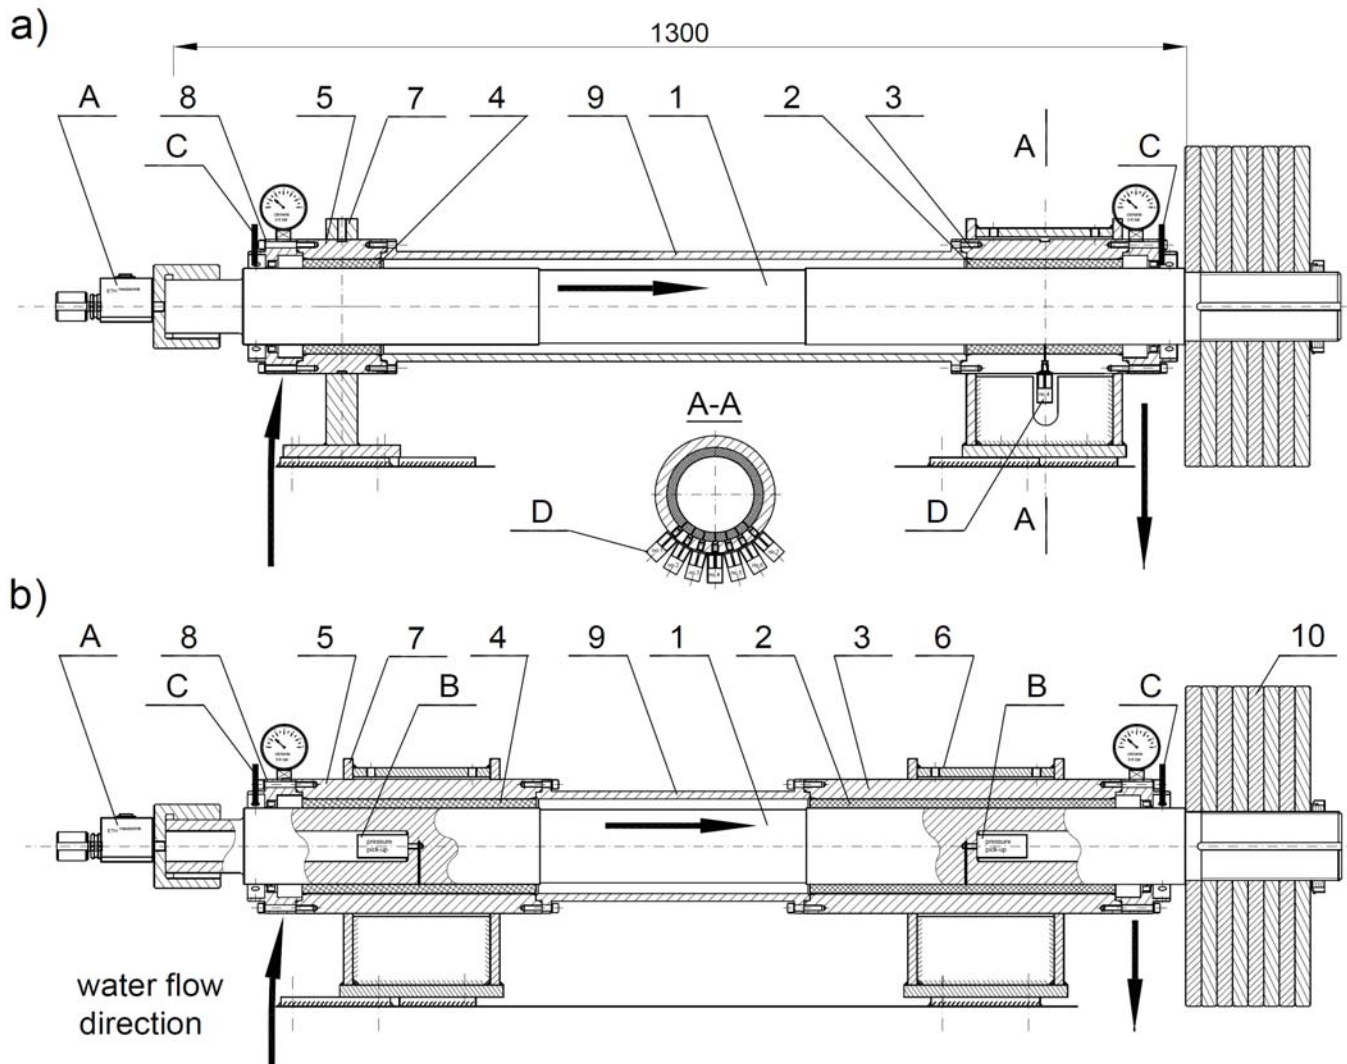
Stand for testing propeller shaft unit - shown in two variants, 1 - main shaft, 2 - stern tube aft bearing, 3 - stern tube aft bearing housing, 4 - forward bearing, 5 - forward bearing housing, 6 - aft bearing support, 7 - forward bearing support, 8 - cover with seal, 9 - bearing bush coupling, 10 - loading steel discs - representing propeller weight
